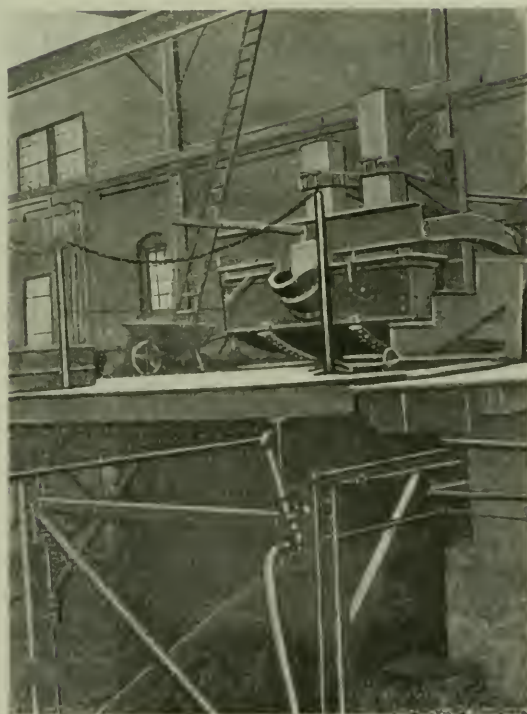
Showing mounting of a Heroult furnace and casting pit.
